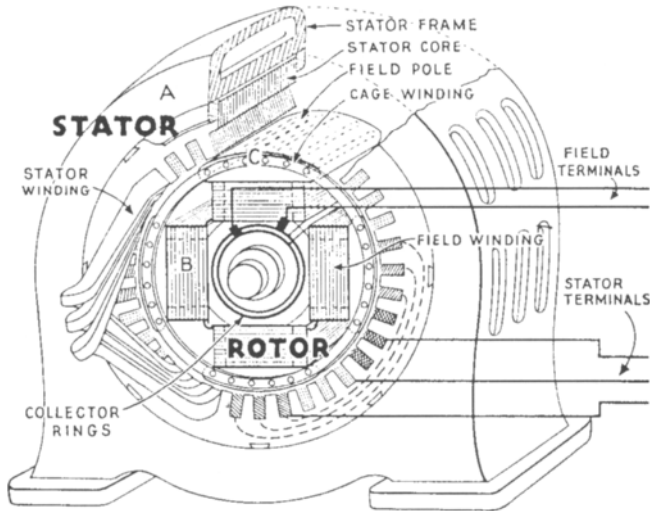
D. Cutaway and partly developed illustration of 4-pole synchronous motor to show elements of construction and external wiring. (Used by permission: Bul. 200-Tec-1120 ©1955, Dresser-Rand Company.)
